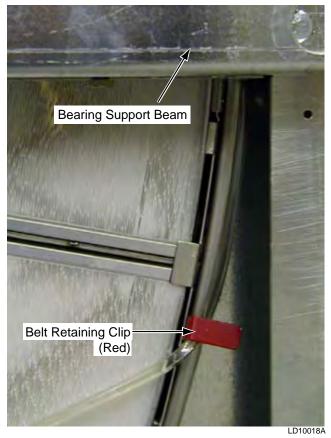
RETAINING CLIP WITHIN A FEW INCHES OF THE BEARING SUPPORT BEAM
